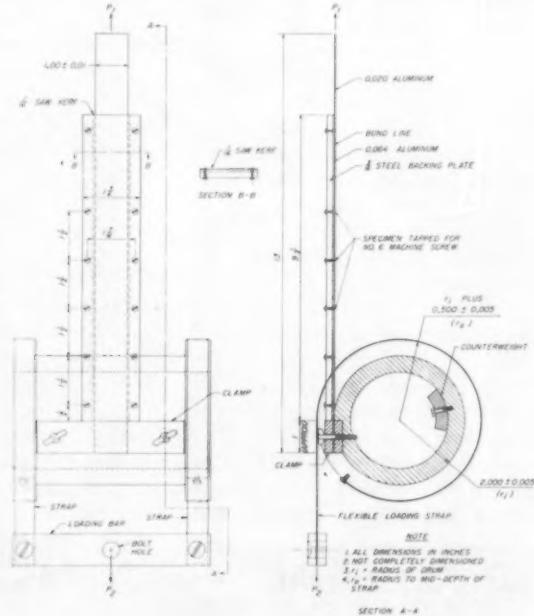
Apparatus and test specimen used for making peel tests on metal-to-metal bonds
